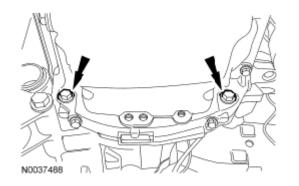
Locating Oil Pan-To-Bellhousing Bolts Courtesy of FORD MOTOR CO.
